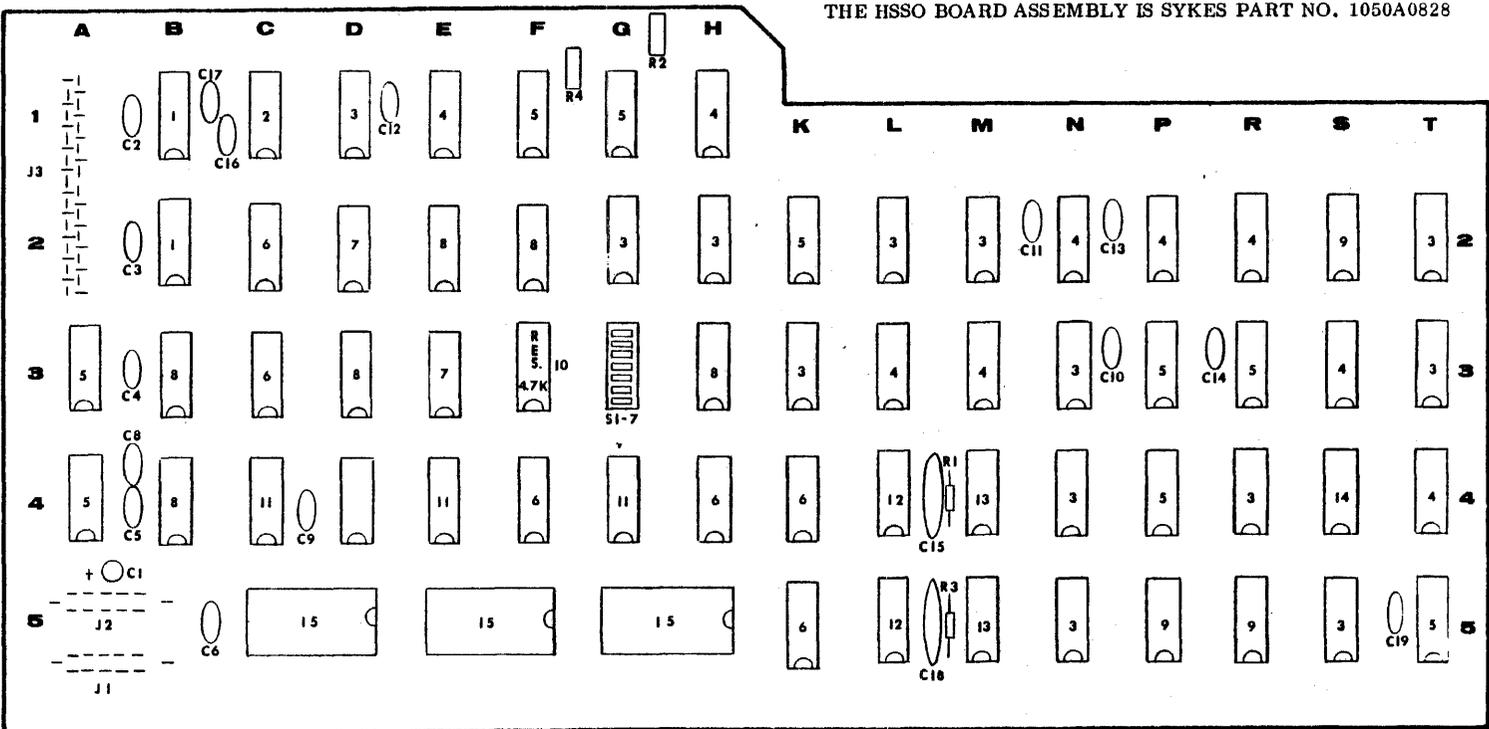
HIGH SPEED SEARCH OPTION (HSSO) BOARD
